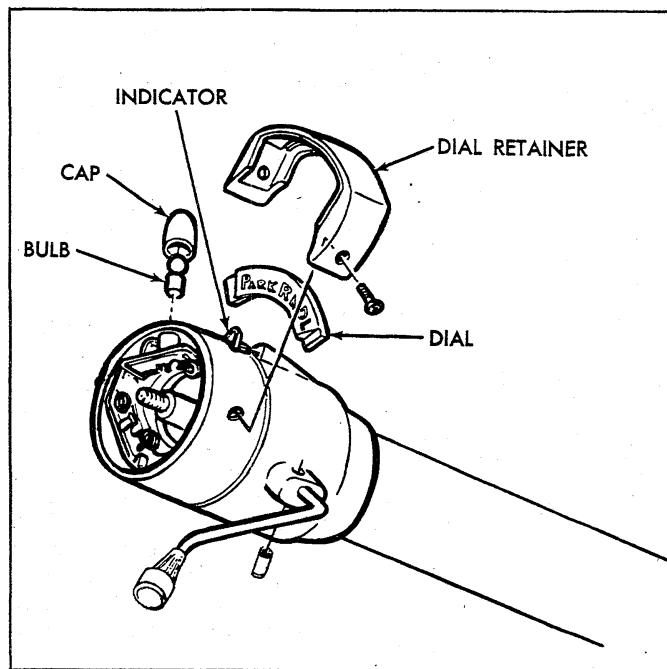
Powerglide Dial Indicator Assembly—Chevy II and Camaro
